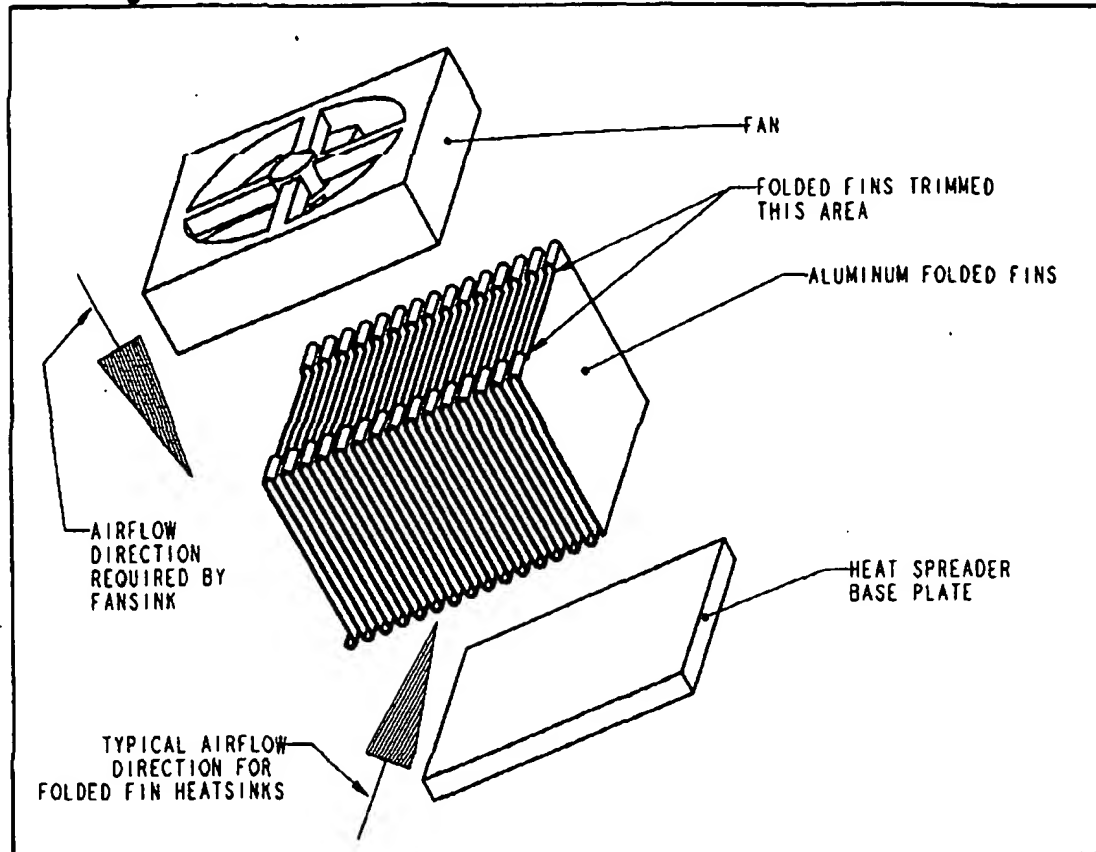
Pre-Assembled (exploded) Isometric View of FFF-Sink.
